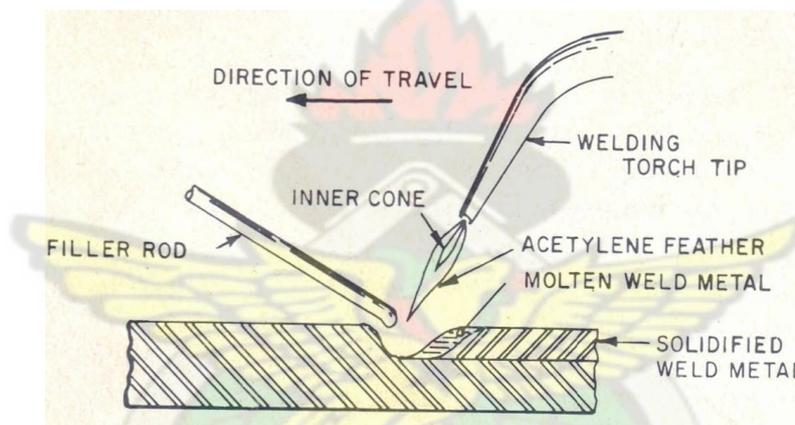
Oxyacetylene welding process diagram. (Cary, 1997)
